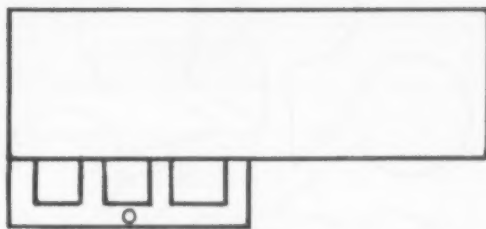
The poorly designed gating system pictured above might possibly result in a warped casting.
